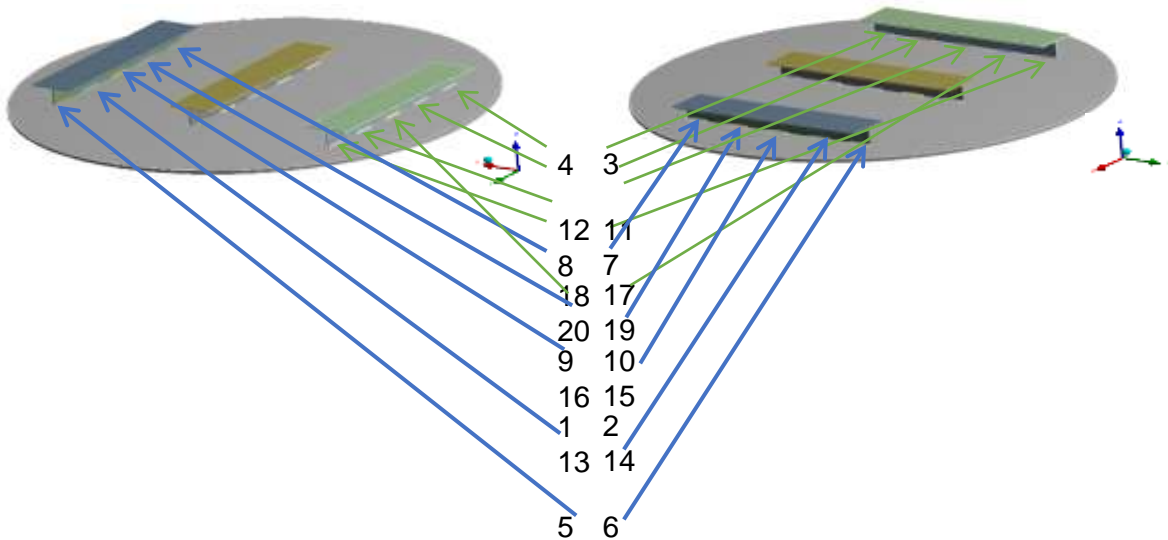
End to End plates transverse zig-zag welding sequence(WS-4)
